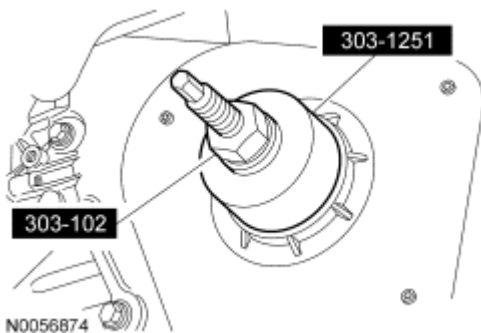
Installing Crankshaft Front Seal Using Special Tools (303-102) & (303-1251)
